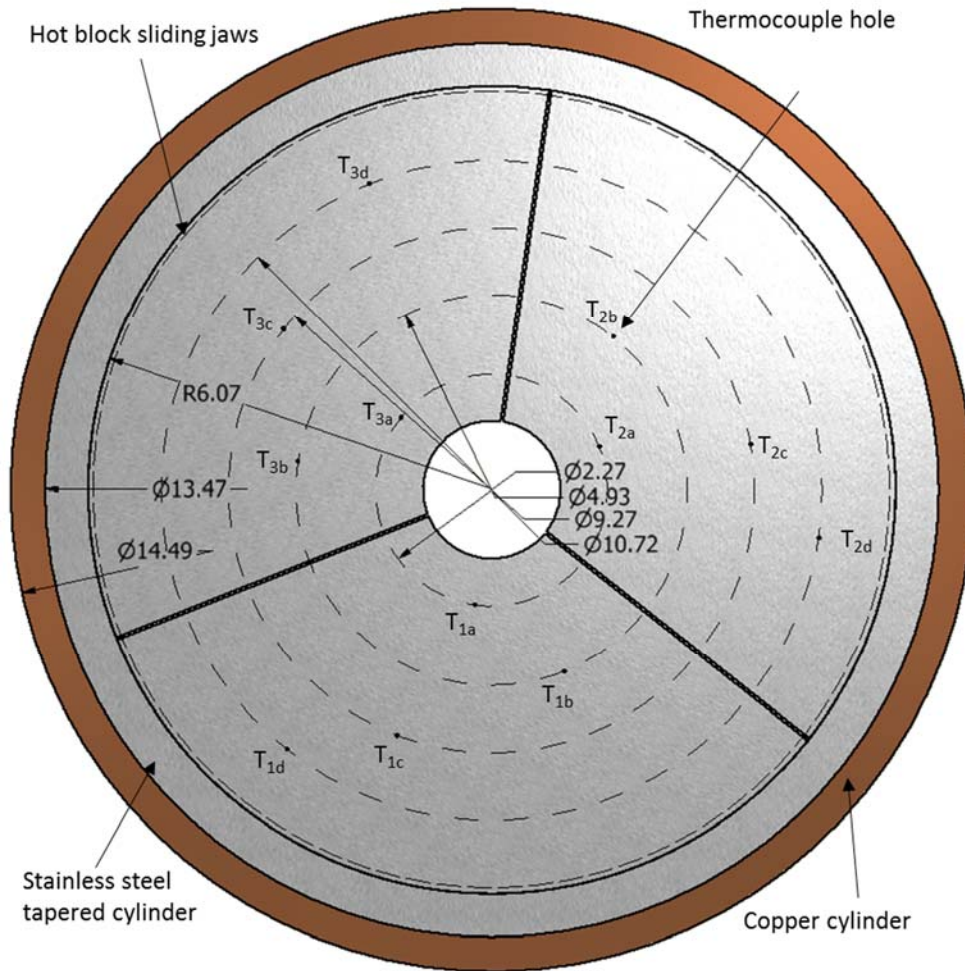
Hot side stainless steel blocks with thermocouple locations, dimensions in cm - elevation
